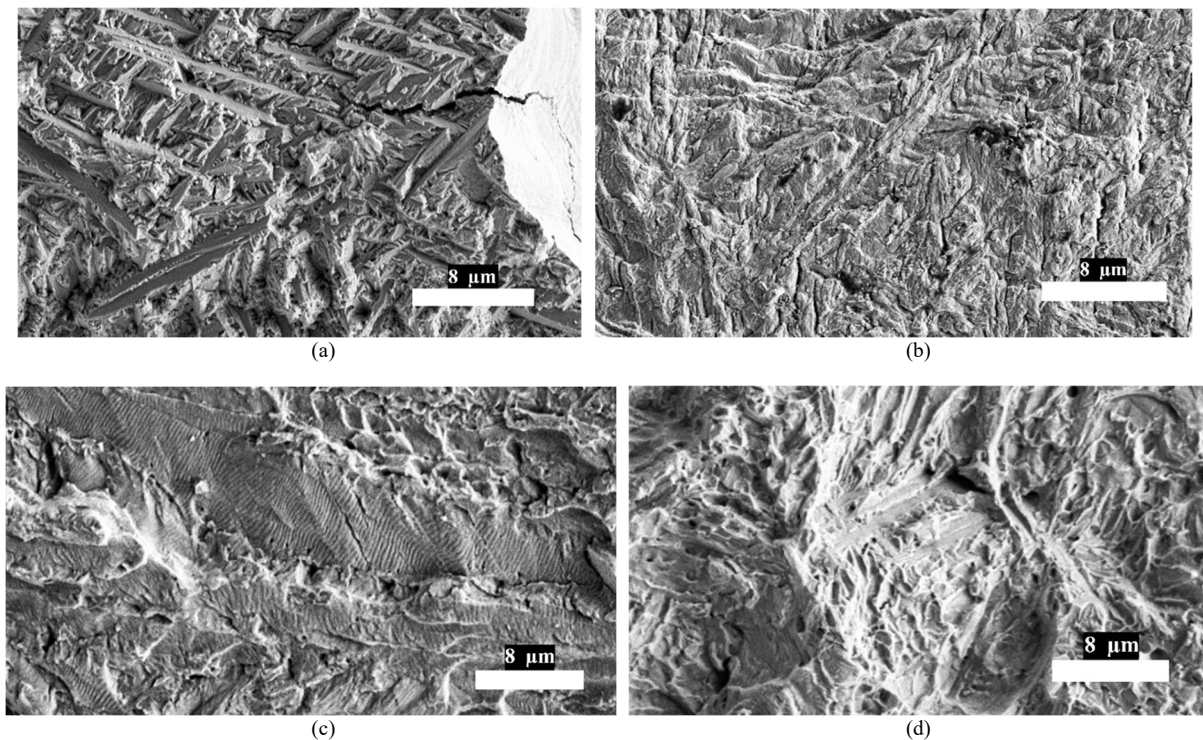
Fracture surface evolution. (a) Microstructurally textured fracture surface, (b) irregular bright region, (c) striated zone, (d) dimpled fracture surface.
